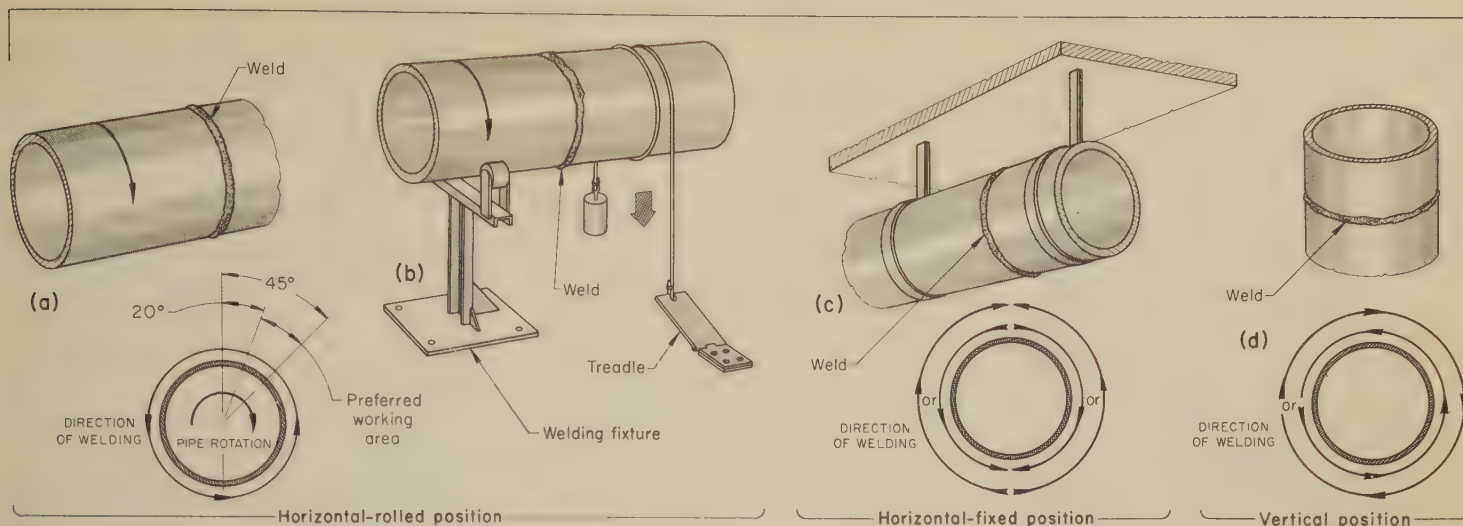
Three basic positions for welding pipe and a simple turning fixture for welding in the horizontal-rolled position
